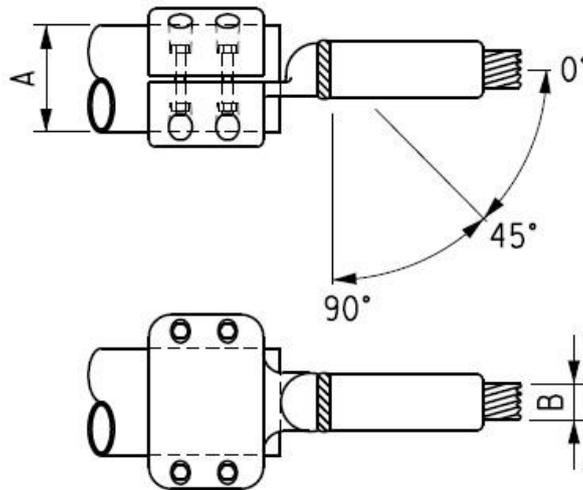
ETP-TE-IL 1: Clamp – Tap-off – Tube end - Inline – One Conductor (D-DT-6090)
